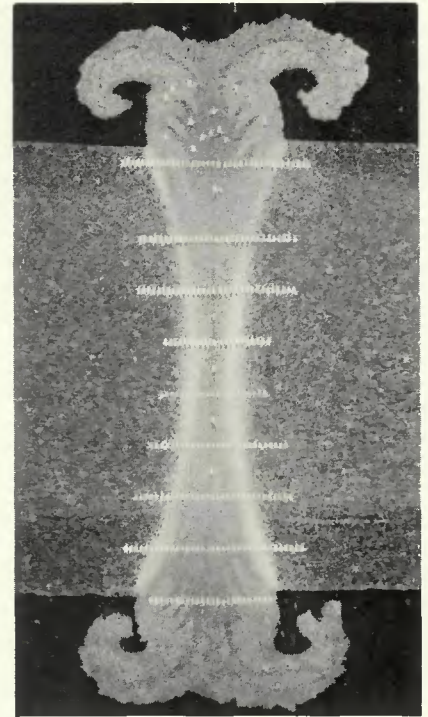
Macrograph of a low carbon steel weld
